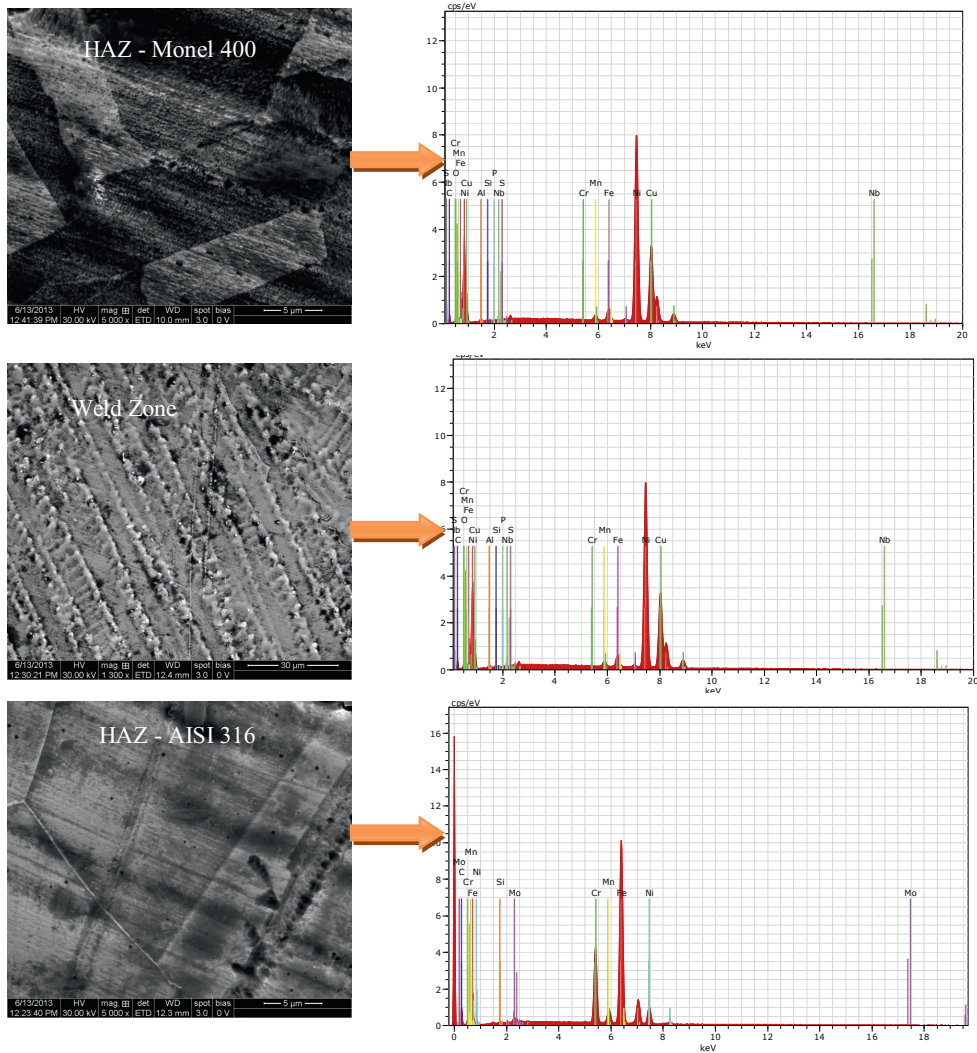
SEM/EDAX analysis of the GTA weldments of Monel 400 and AISI 316 (as welded conditions)
